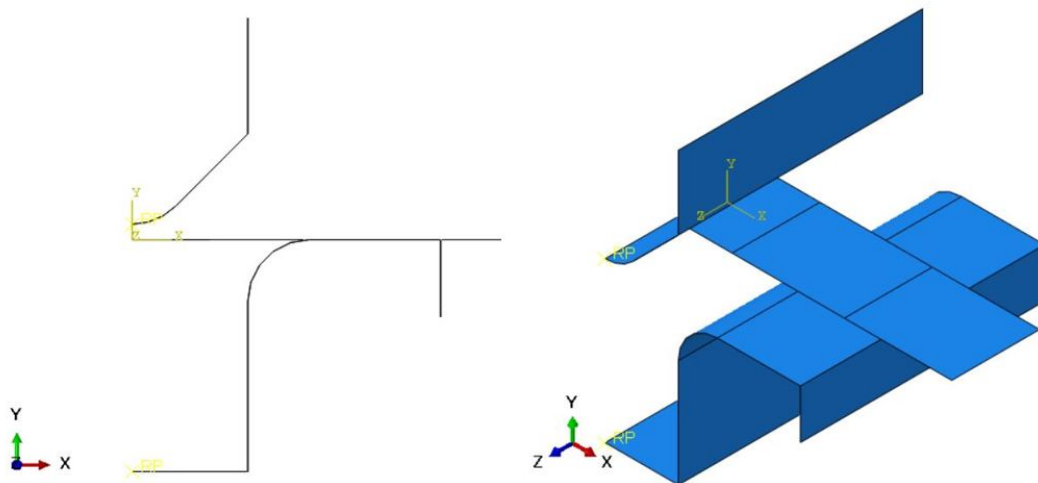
Tool, die, and sheet assembly at start of deformation (a) Front view, (b) Isometric view
